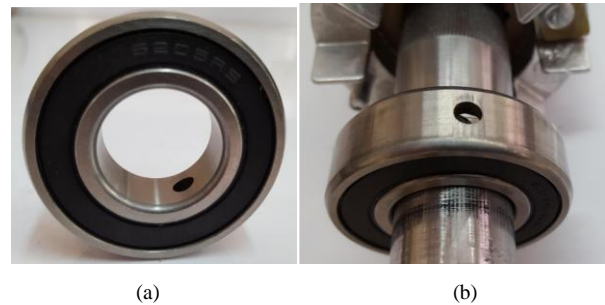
Photograph of the ball bearing with a hole on the: a) inner raceway, and b) outer raceway.
